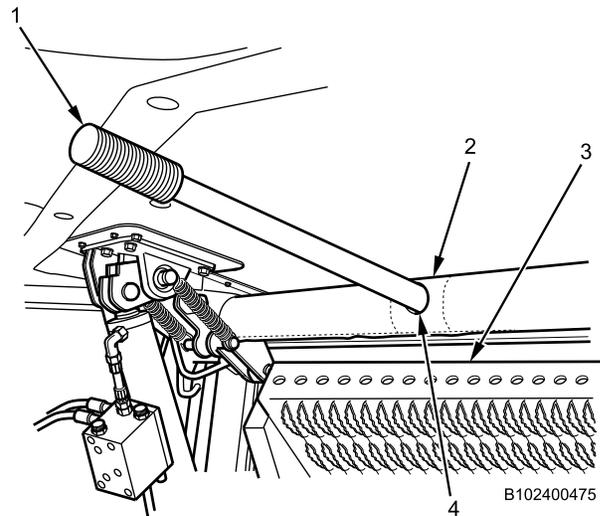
Rear Door/Ramp Locker Shaft and Pump Handle.
